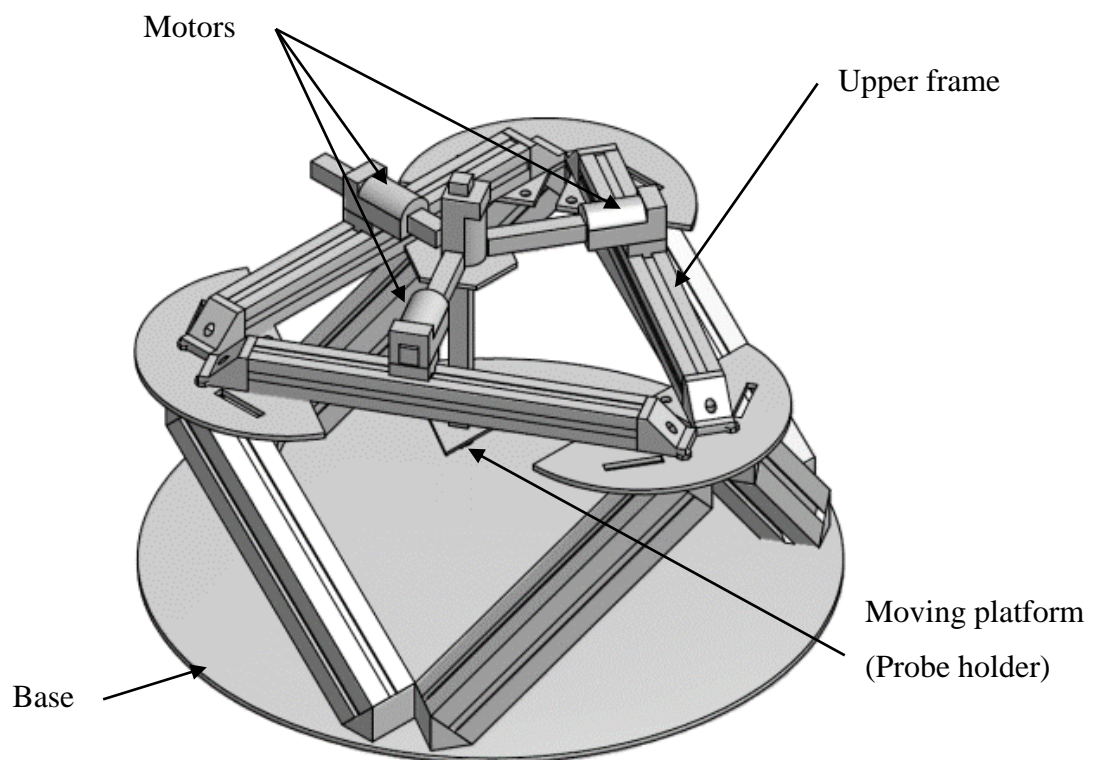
a: Isometric drawing of the initial micro-CMM design.
